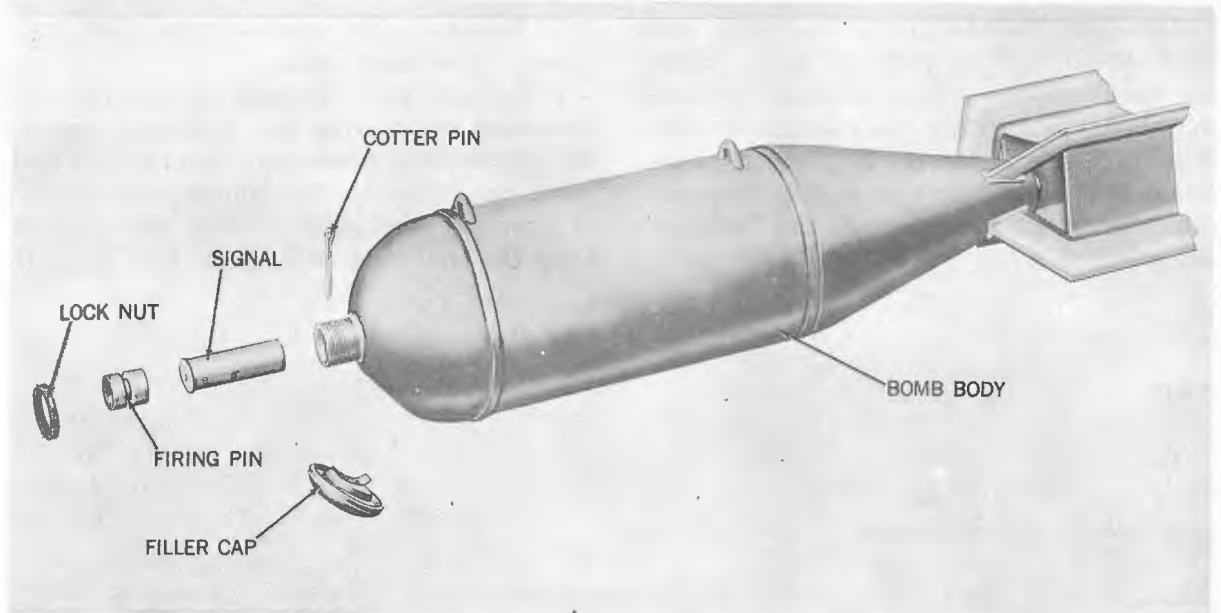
100-lb Practice Bomb Mk 15 Mod 4, Exploded View.
